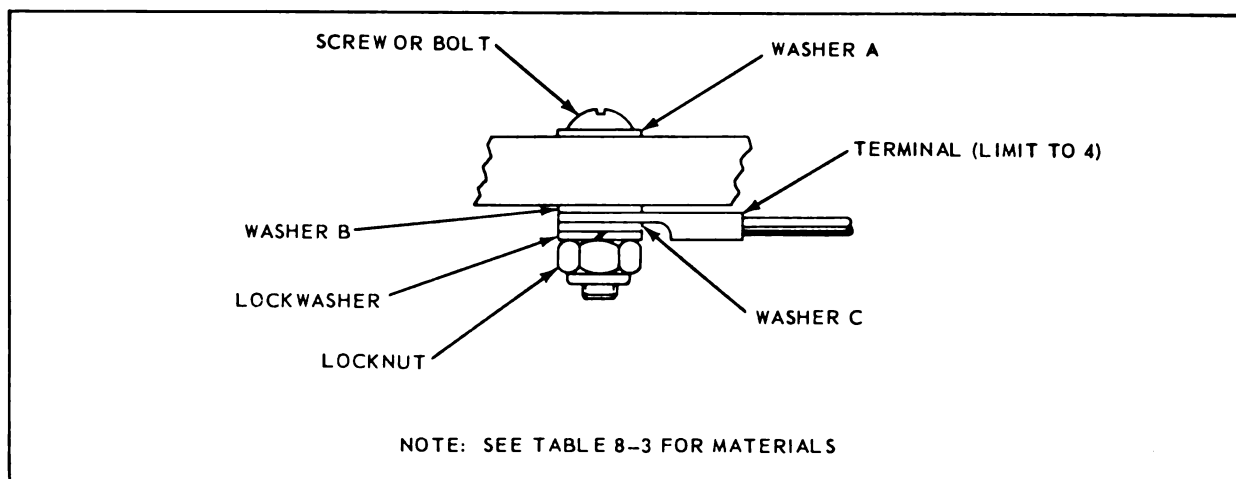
Bolt and Nut Bonding or Grounding to Flat Surface
